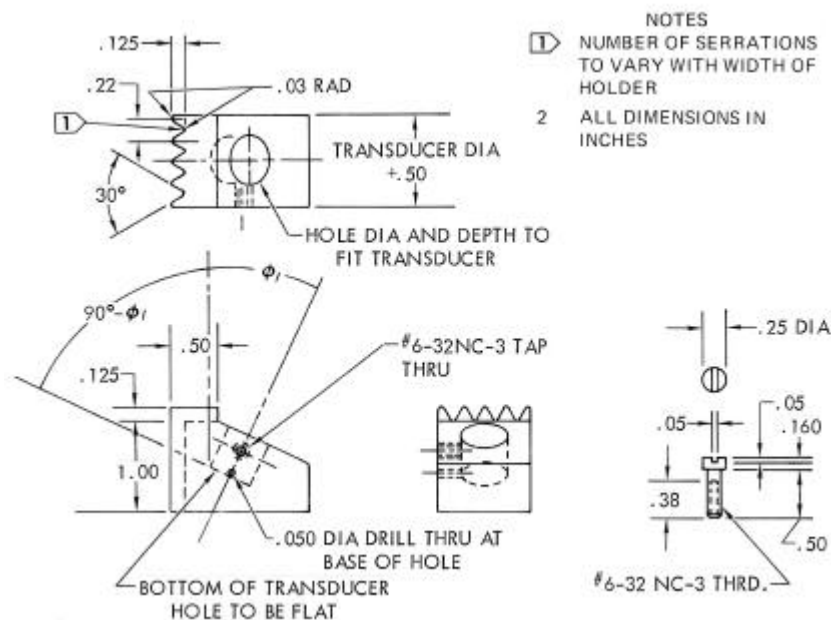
Angle Beam Wedge with Hole for Mounting Search Unit.
